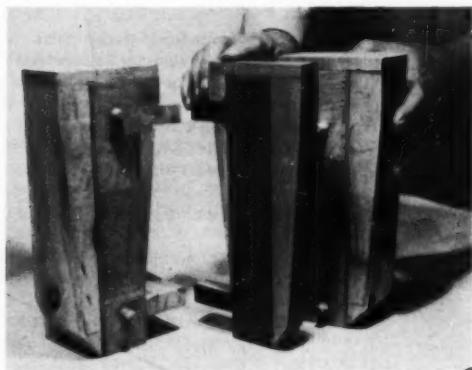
shows a section of the pattern of the gear with the 1 in. thick section used to calculate the riser dimensions, and the riser used after calculation.
